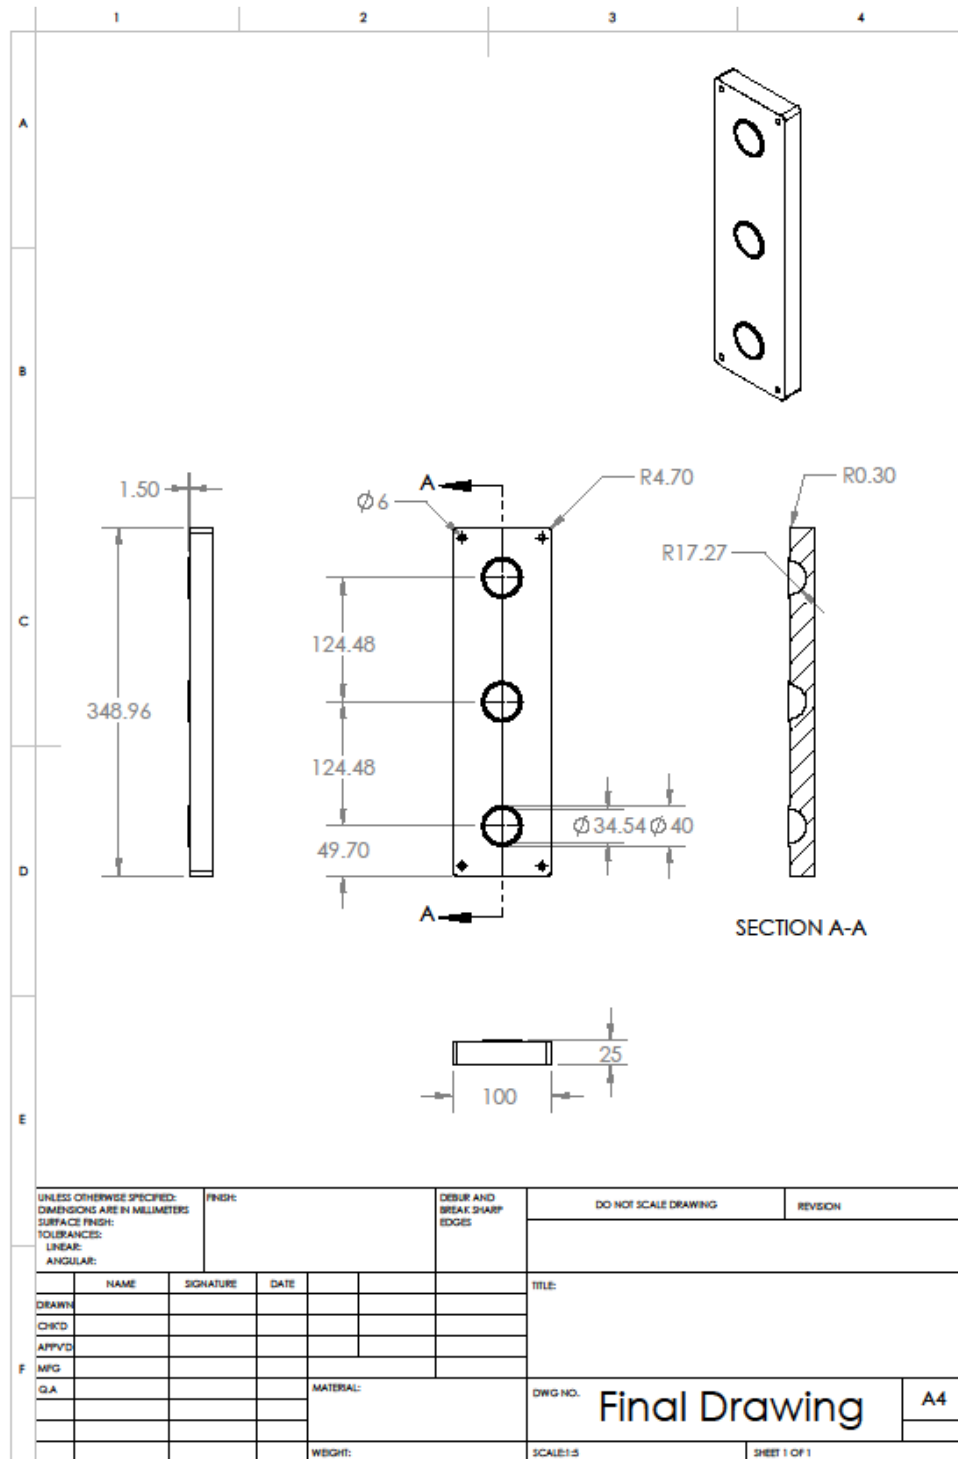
SolidWorks drawing with dimensions for the aluminium mould.
